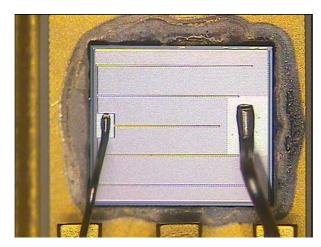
Die full view Die dimensions: 4.3mm x 4.8 mm
